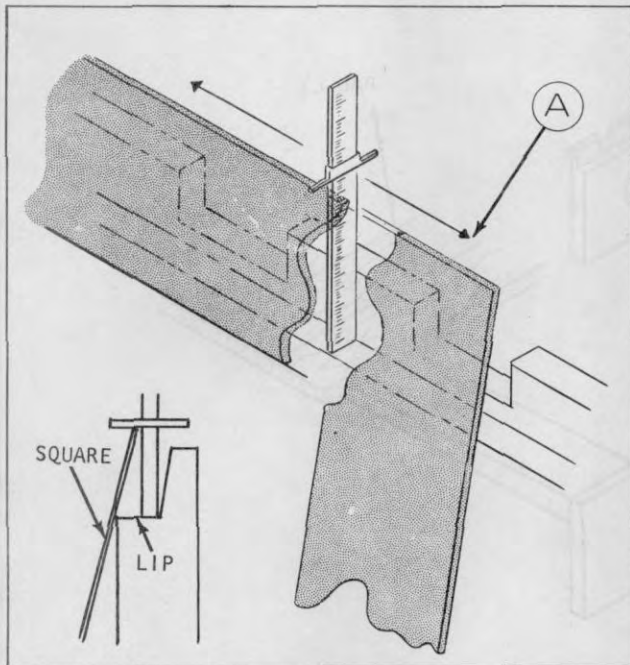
Squaring Carriage Rollers (Six Roller Carriage)
